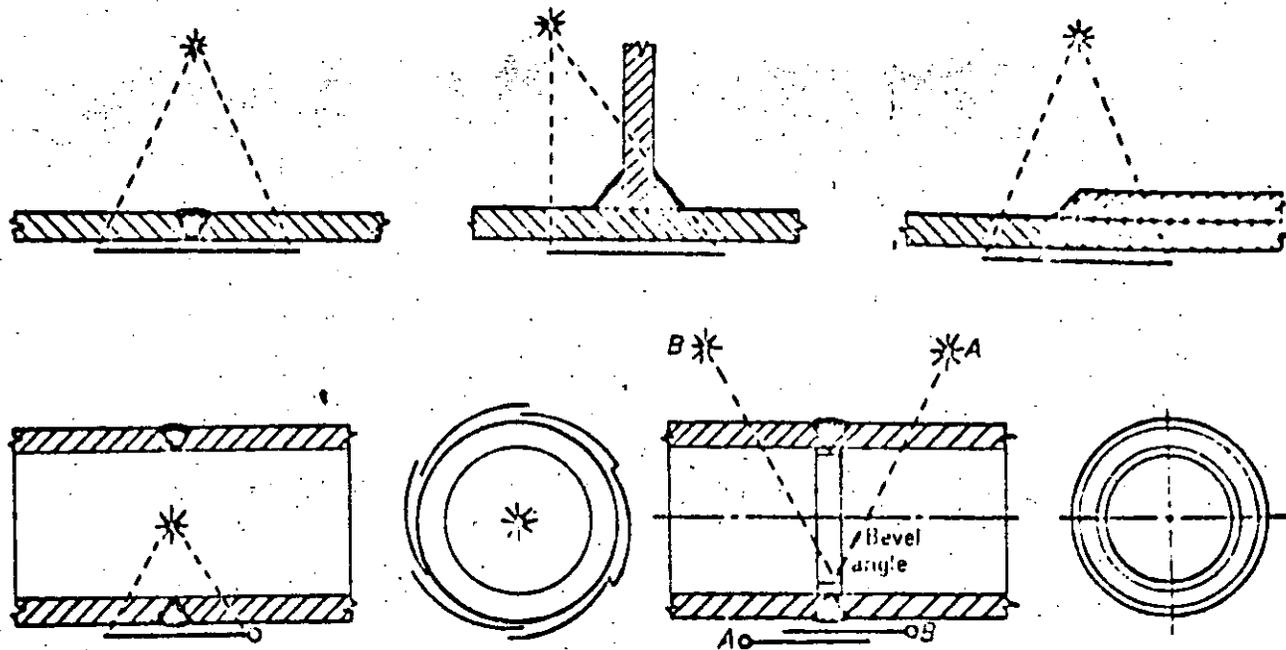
Typical arrangements of X-ray source and film in radiography of welds. The angle of exposure and the geometry of the weld influence interpretation of the negative. Note that multiple exposure may be necessary for pipe welds. Of the several welds shown above, fillet welds are the most difficult to x-ray and the most difficult to interpret.
